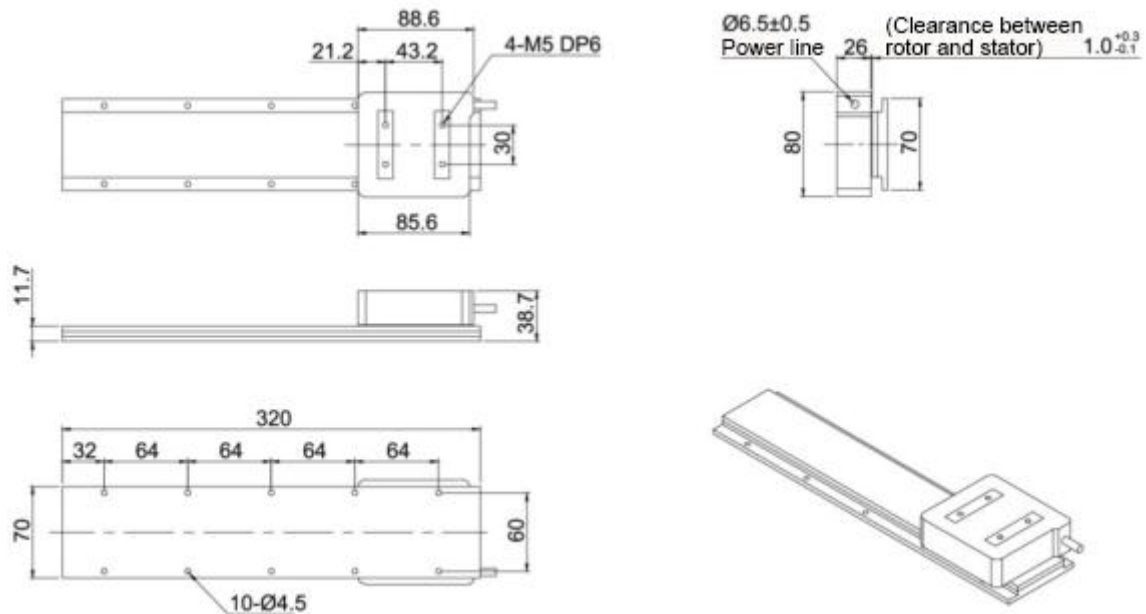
Dimensional drawing of WZCR-AZ70C1-□ motor
